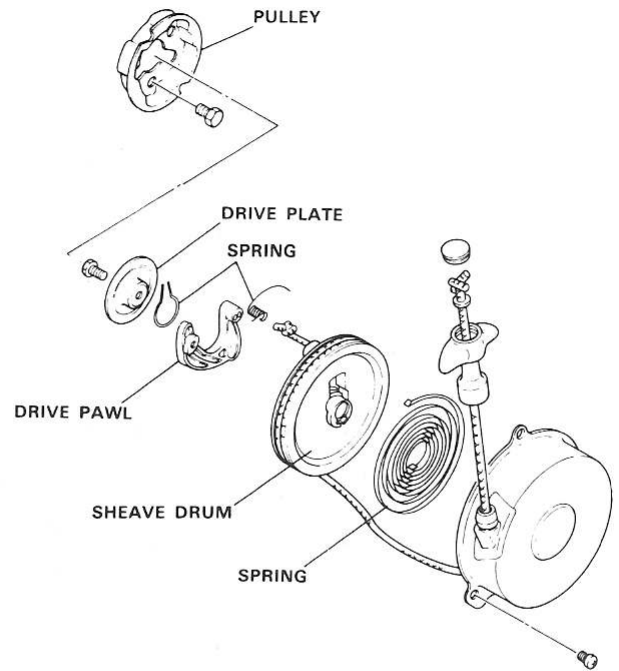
A.24 YT 60 recoil starter components — exploded view (Sec 17)
